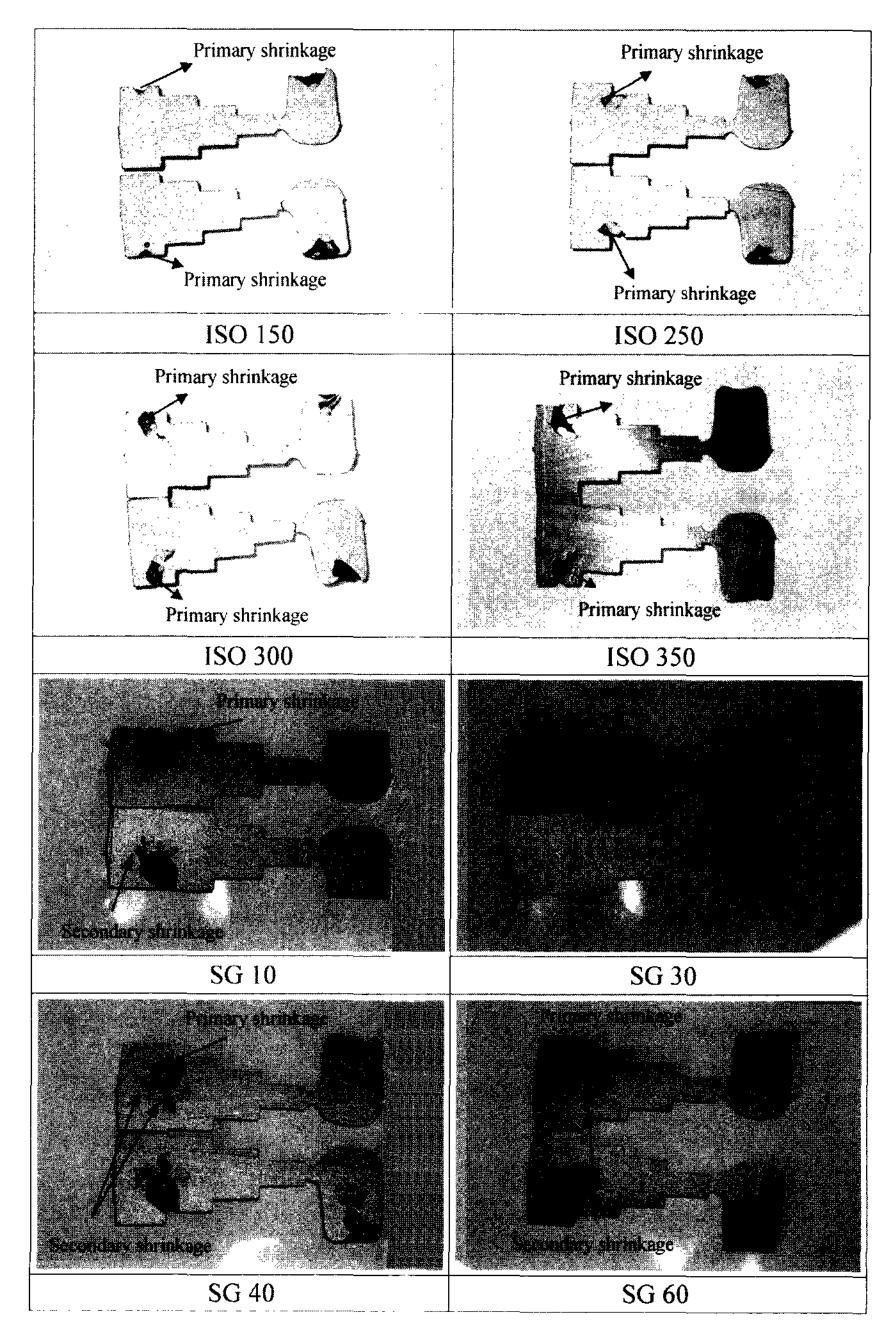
Sectioned views of some specimens in the No. 1 riser design.
